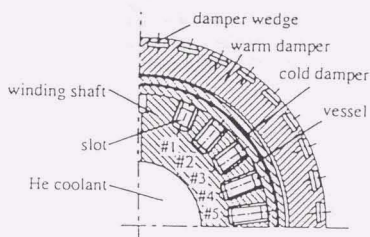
Cross section of rotor (perpendicular to center axis, quarter of the rotor).
